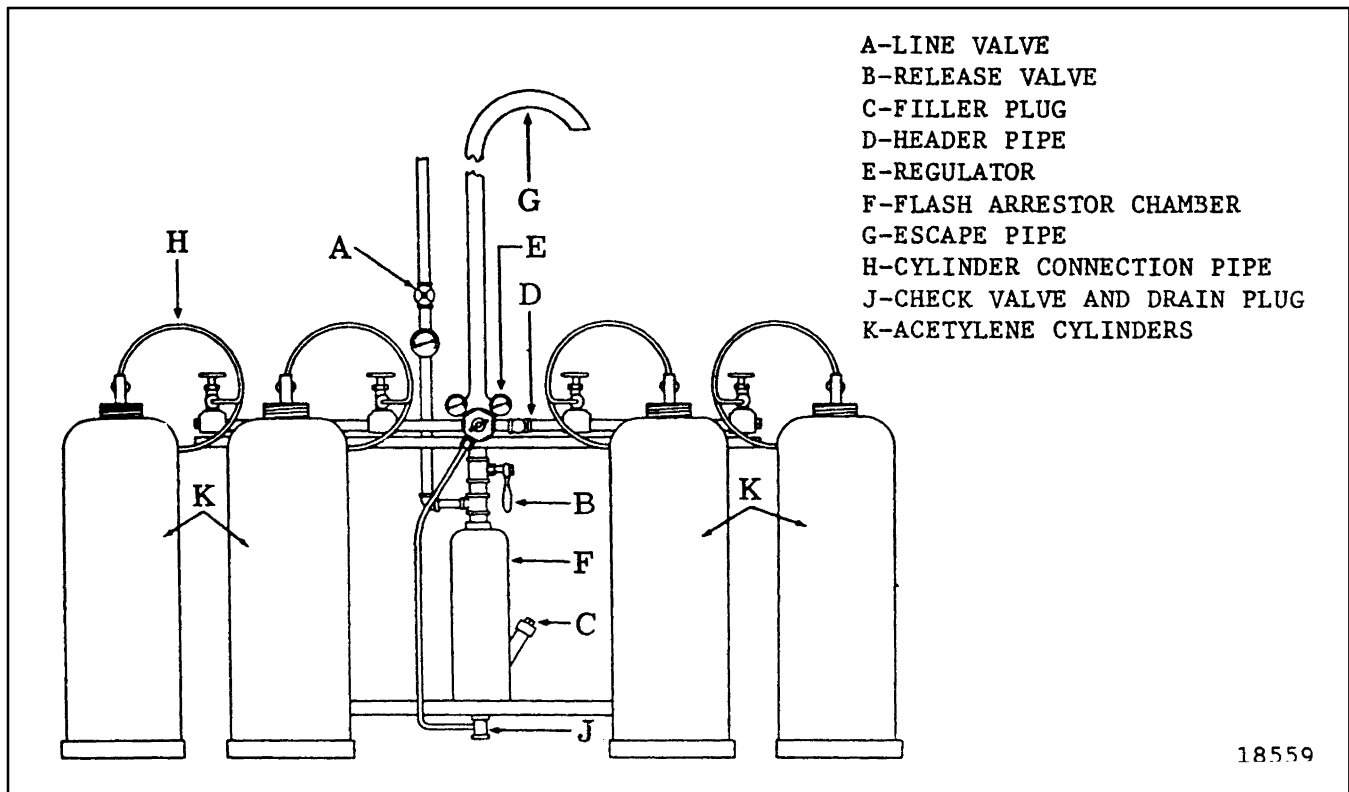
Stationary Acetylene Cylinder Manifold and Other Equipment
